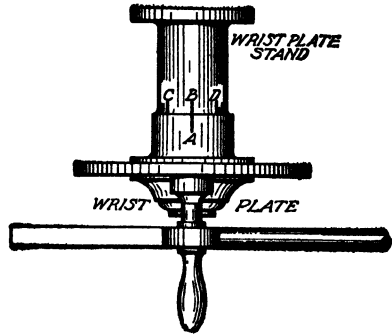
Corliss Wrist Plate for Adjusting Carrier Rod
